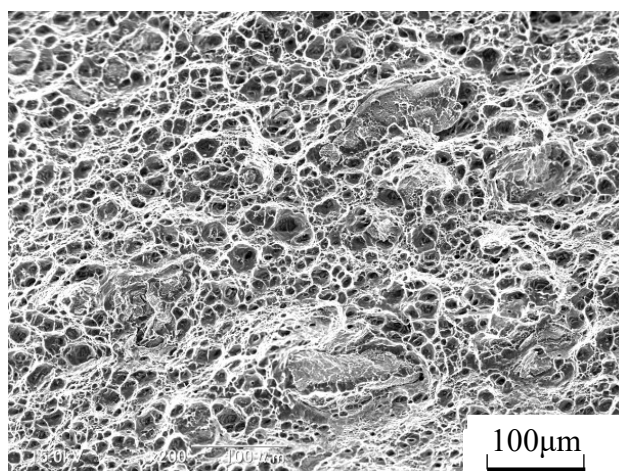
Fracture surface observed on SUS304 side.
